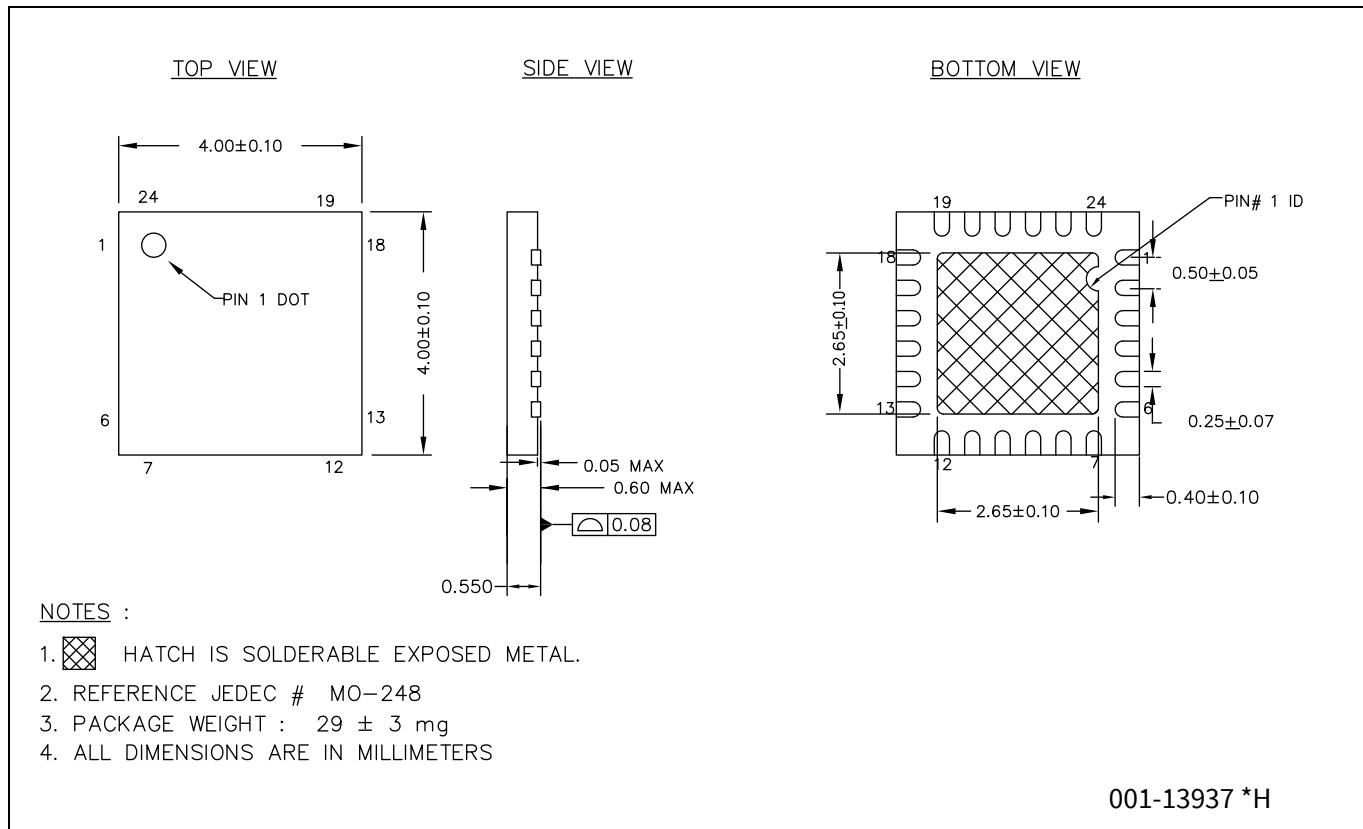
24L QFN (4 × 4 × 0.55 mm), LQ24A, 2.65 × 2.65 E-Pad (Sawn) (PG-VQFN-24) package outline
